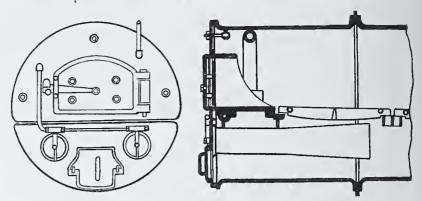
Type of Steam Jet Blower Forced Draught Furnace, as used for Burning Coke Breeze.
